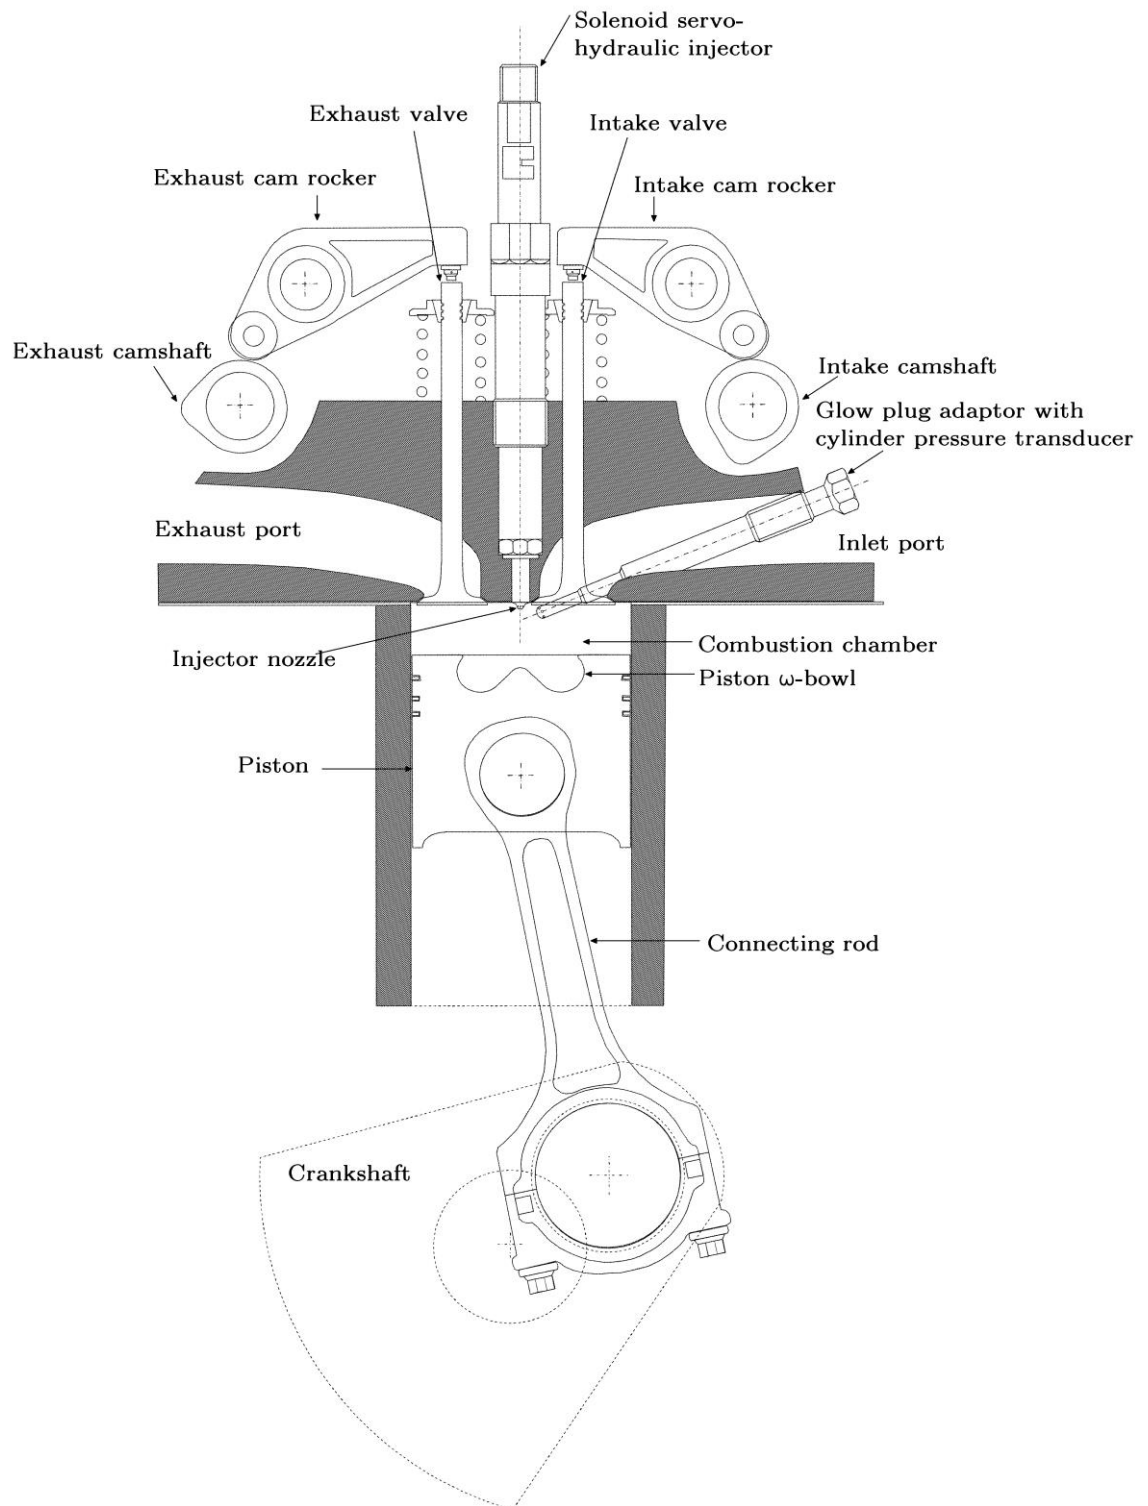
Schematic showing a section through the cylinder head and crankcase of the research engine (Schönborn 2009)
